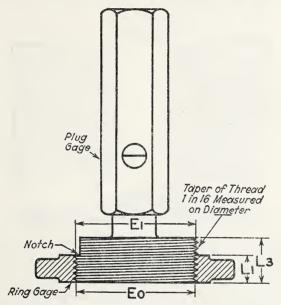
Standard taper pipe thread plug and ring gages.
